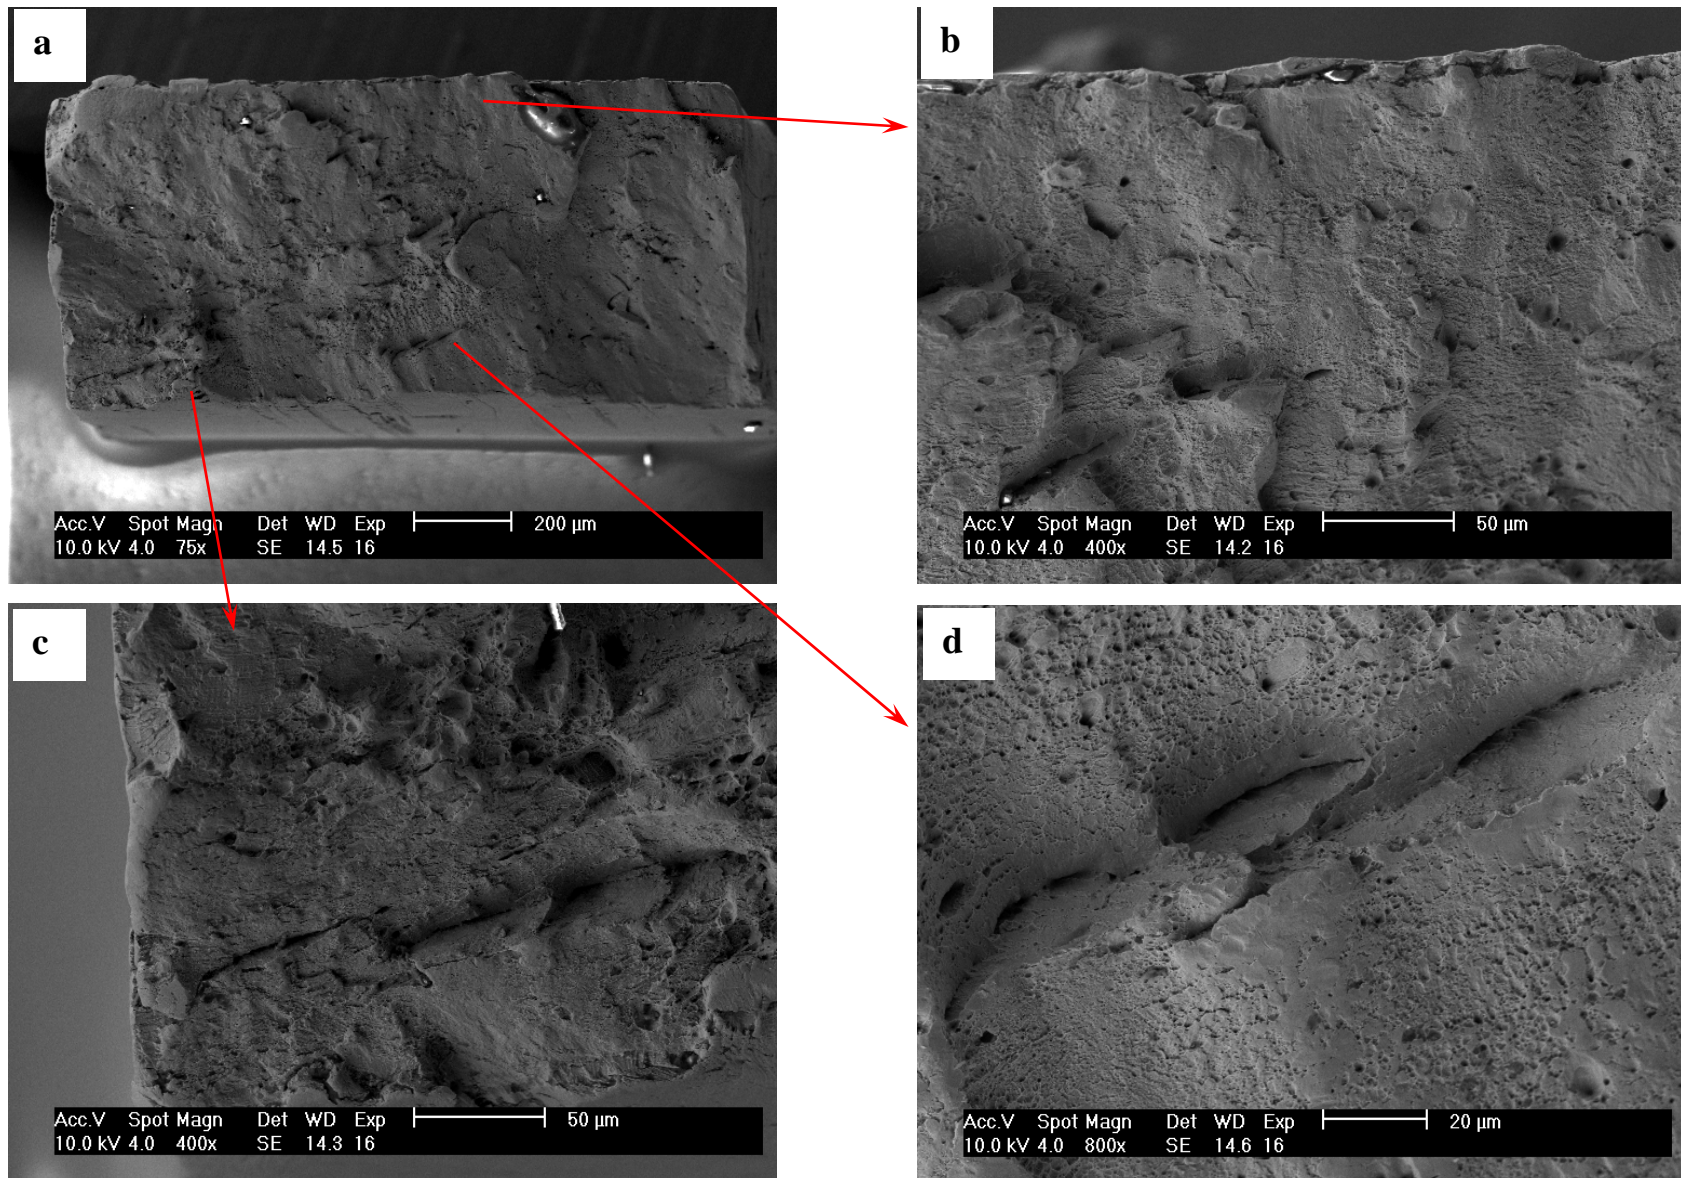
Fracture surface of CW Type 316 SS irradiated to 47.2 dpa and tested in PWR water (specimen B6-6).
